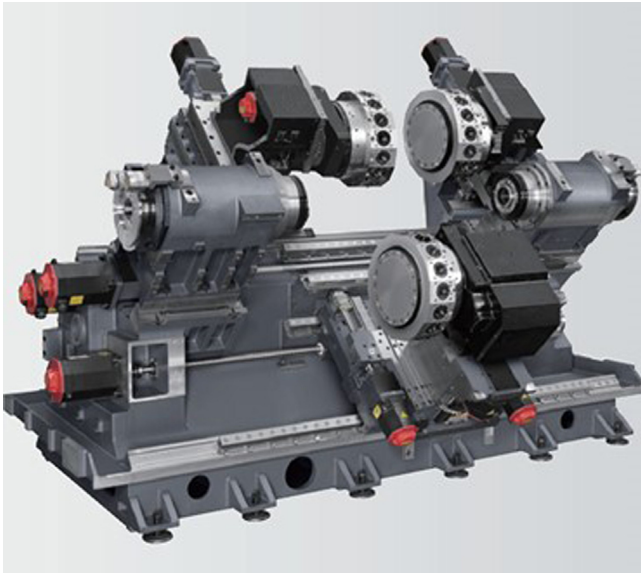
A real example of a machine with multiple spindles and turrets [8].
